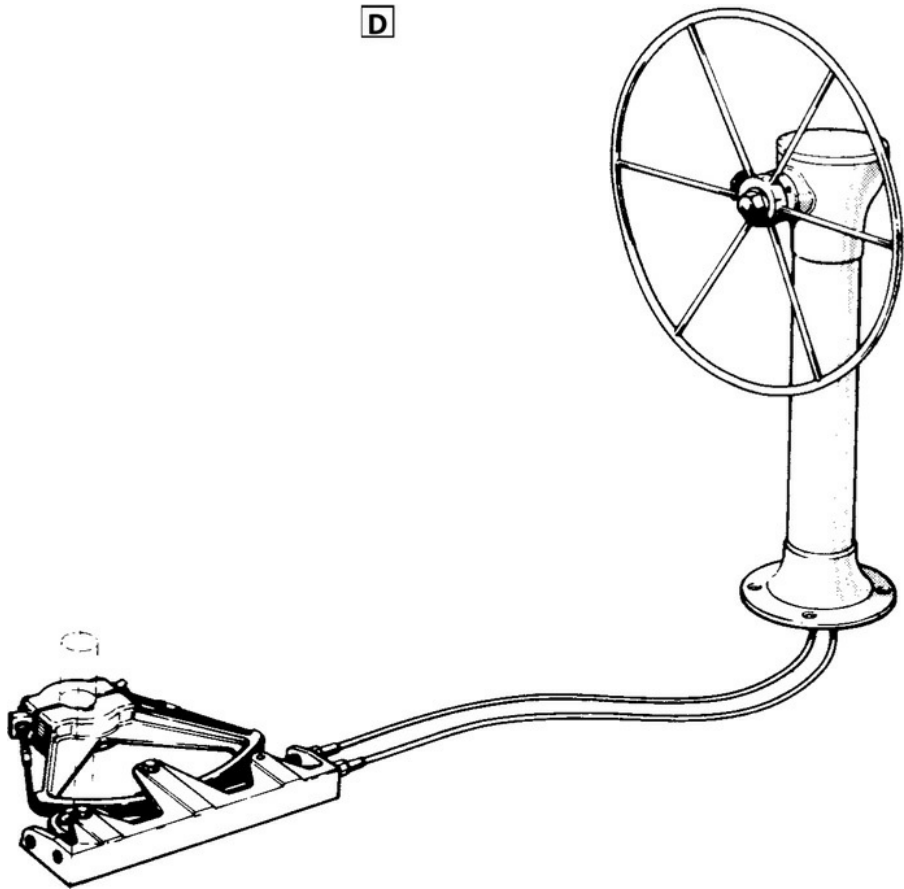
D. Pull-pull cable steering via a quadrant mounted on the rudder-head. (Whitlock)
